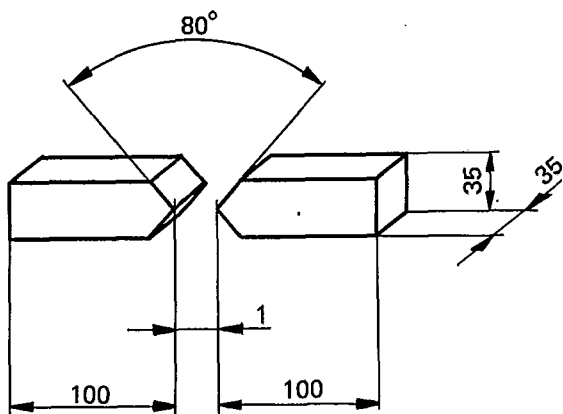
Preparation of assembly for braze-welding (cast iron)
